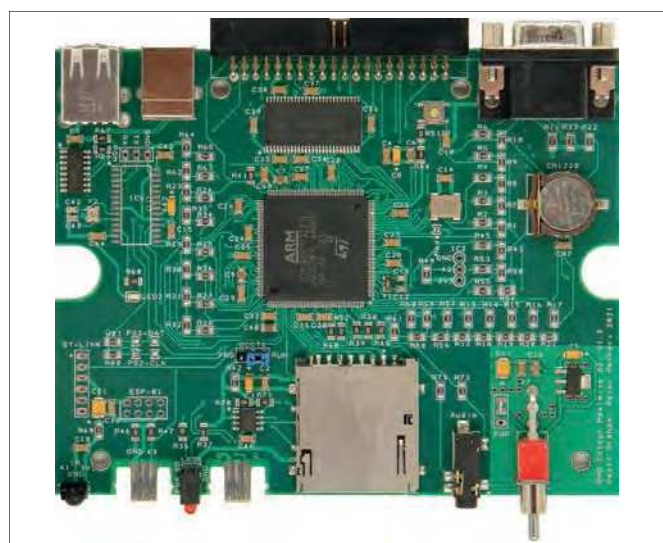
The assembled (4-layer) G2 PCB mostly contains SMDs, all mounted on the top side. Around the edge, there are a handful of connectors, sockets and through-hole components.
